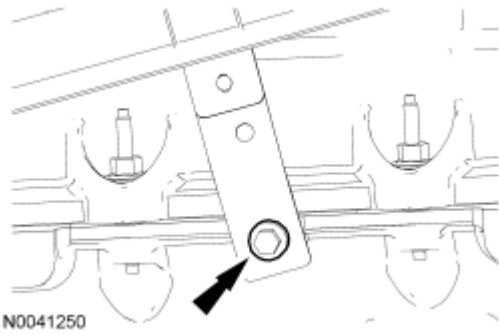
Locating PSP Hose Bracket To Cylinder Head Bolt
